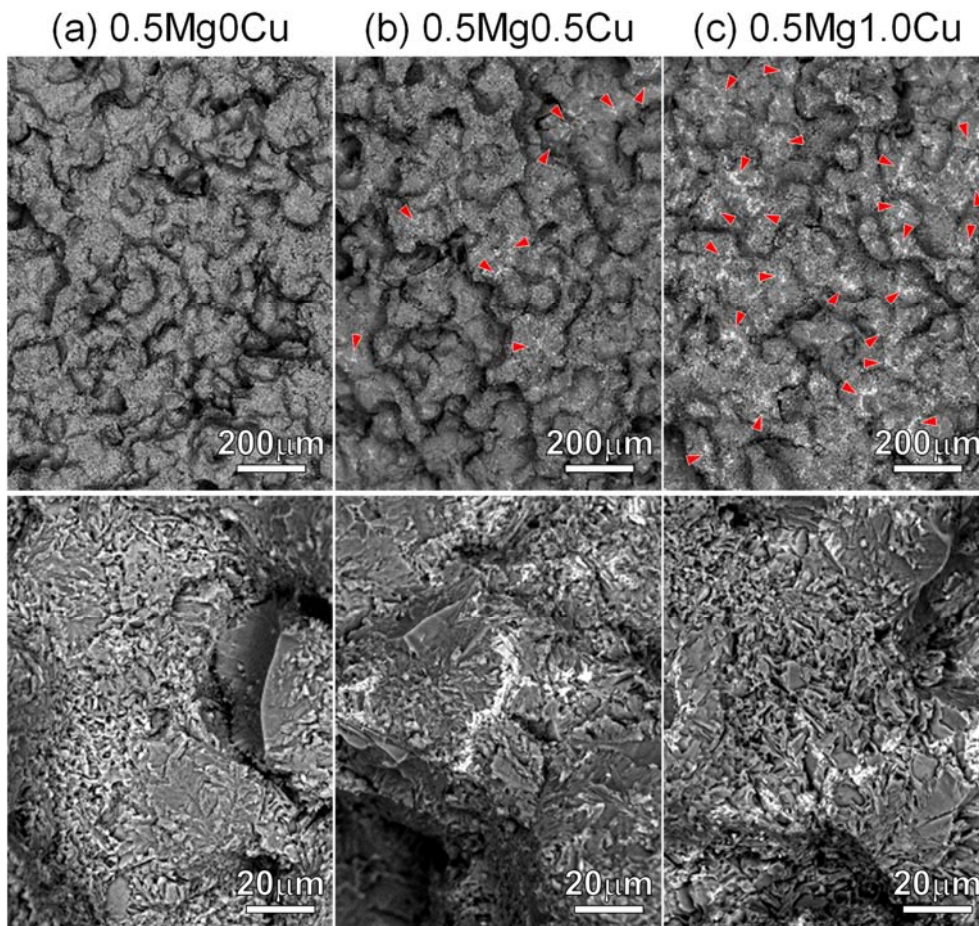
BE images obtained from tensile fracture surfaces of the peak-aged (a) 0.5Mg0Cu, (b) 0.5Mg0.5Cu and (c) 0.5Mg1.0Cu alloys.
